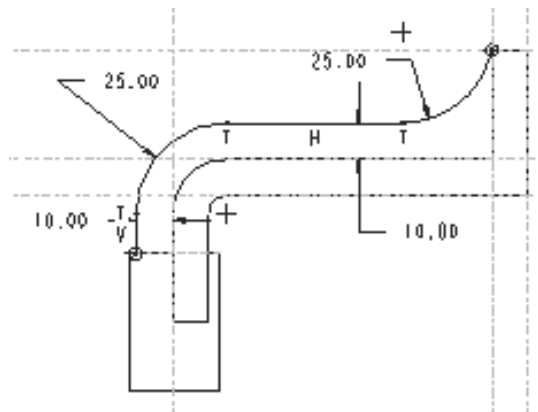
Open sketch of the rib feature with dimensions and constraints
